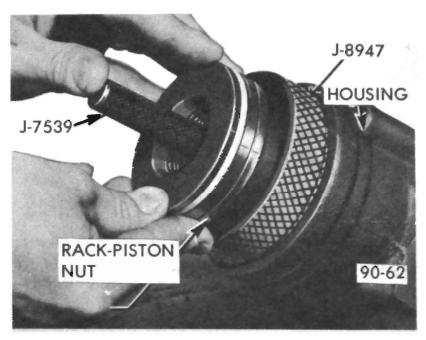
Installing Rack-Piston Nut - 4D-4F-4G-4H Series
